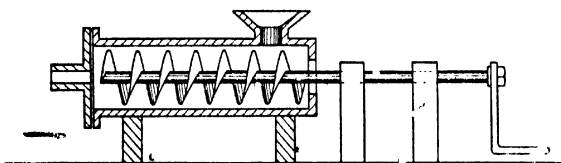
Sausage Machine for Gelatinized Explosives.
